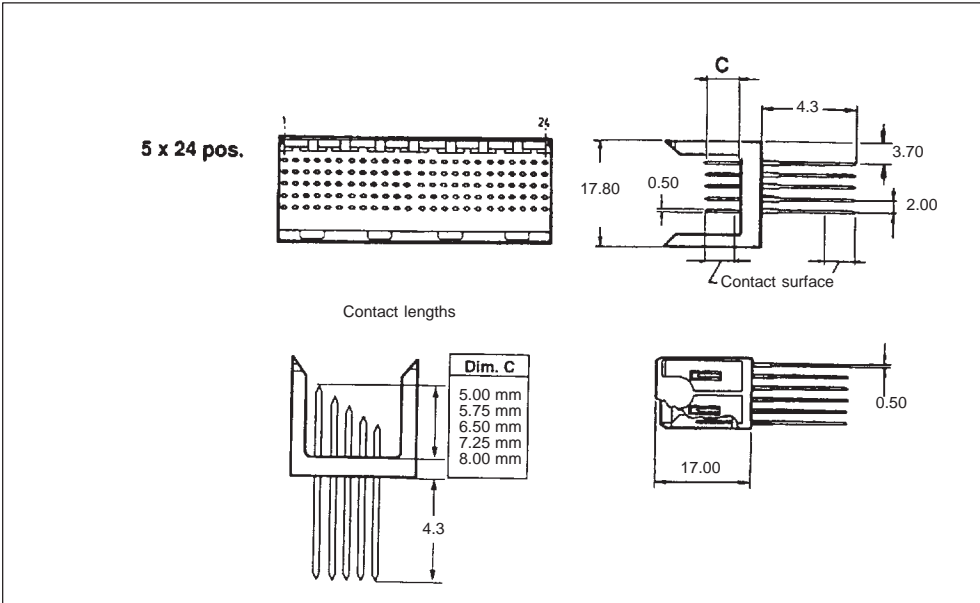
Dimensional drawing of an iPCI bus pin strip
